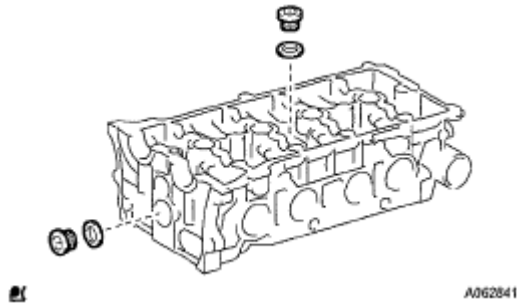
Identifying No. 1 Straight Head Screw Plugs And Gaskets
